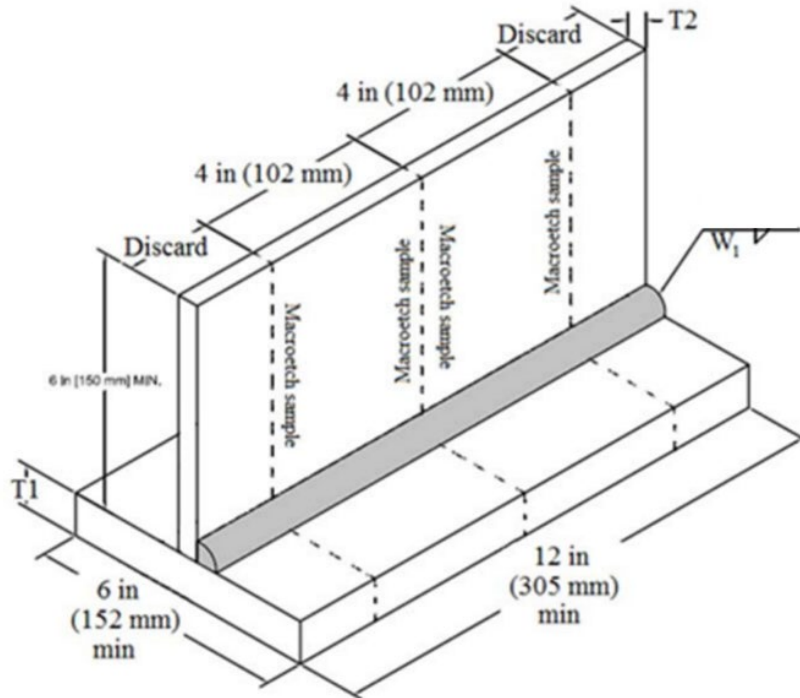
, Sketch that illustrates the weld joint type, and dimensions.
